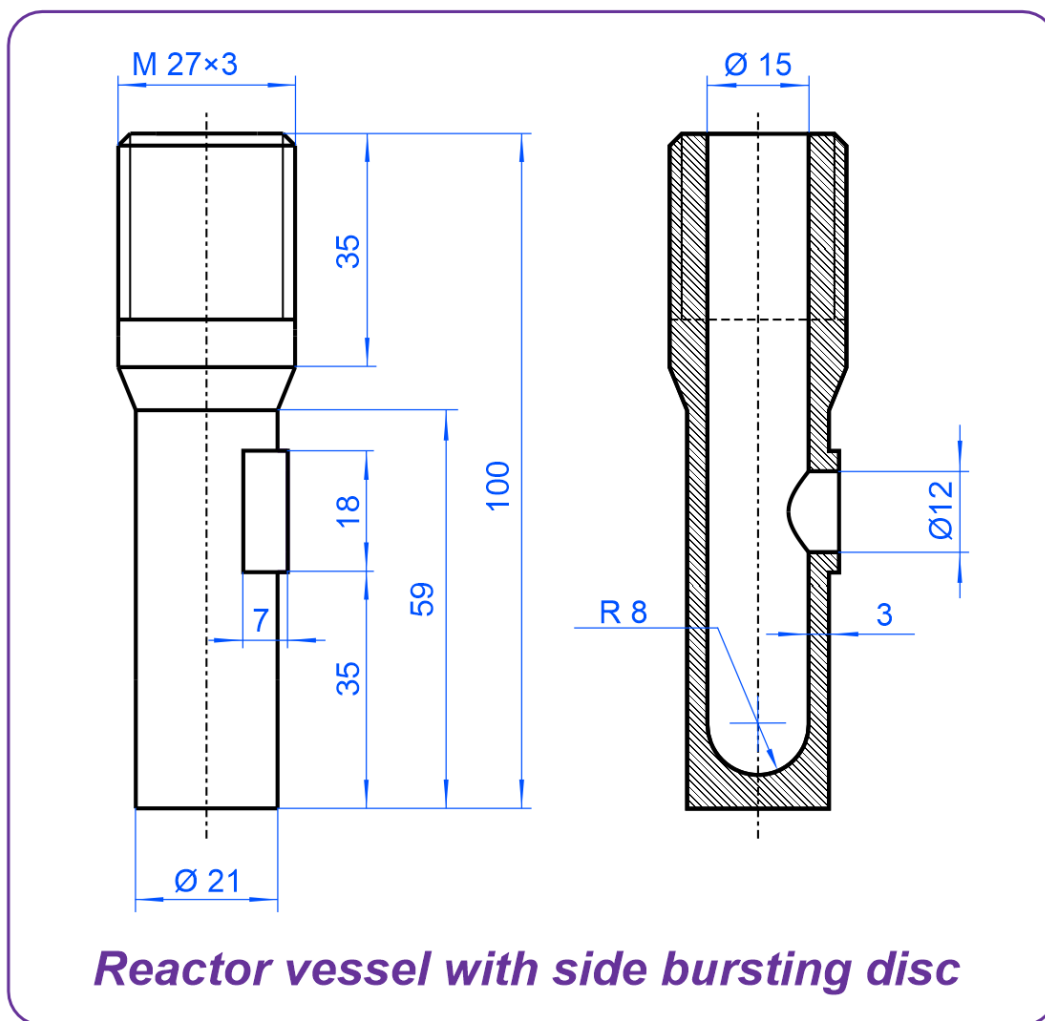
Drawing of the I-tube type 1 reactor vessel with a side bursting disc.
